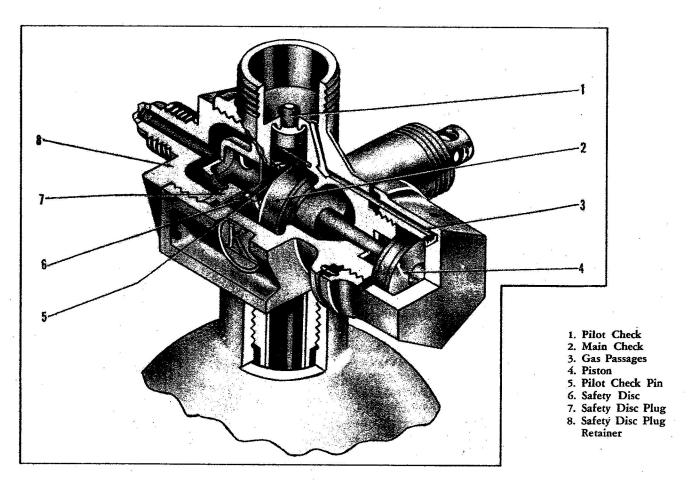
Cutaway View, Three-Quarter Inch Flood Valve
